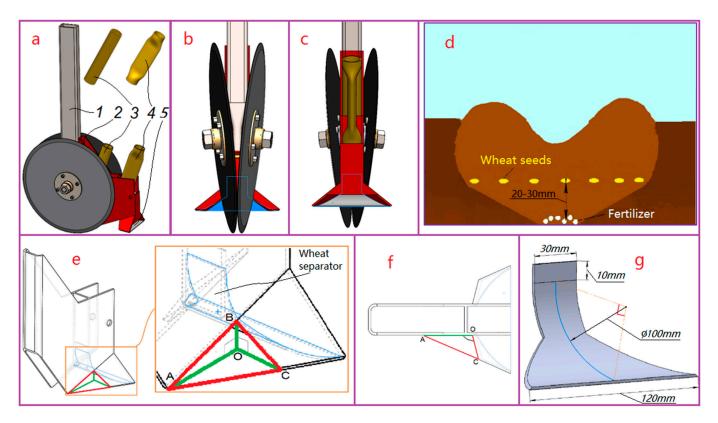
Designed colter parts and parameters: (a). Designed colter parts: base disc colter (1), wing frame (2), fertilizer tube (3), wheat seed tube (4), and wheat separator (5); (b). Front view of the designed colter; (c). Back view of the designed colter; (d). The positions of the fertilizers and wheat seeds in the soil applied with the designed colter; (e). Wing frame orifice parameters; (f). Top view of the wing frame; (g). Wheat separator parameters.
